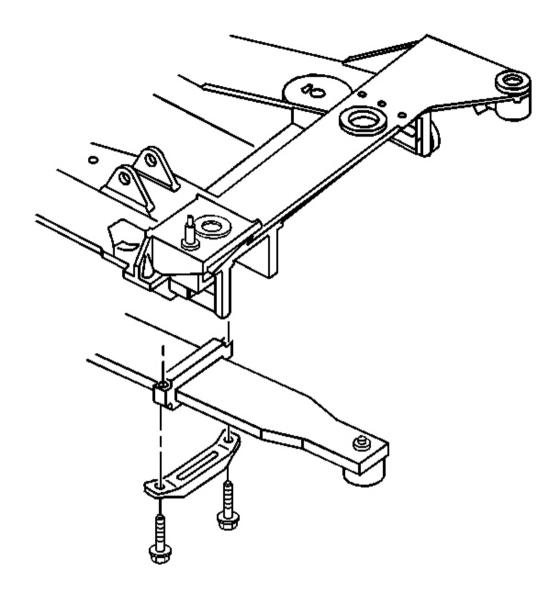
Transverse Spring, Transverse Spring Compressor & Bolts Courtesy of GENERAL MOTORS CORP.
